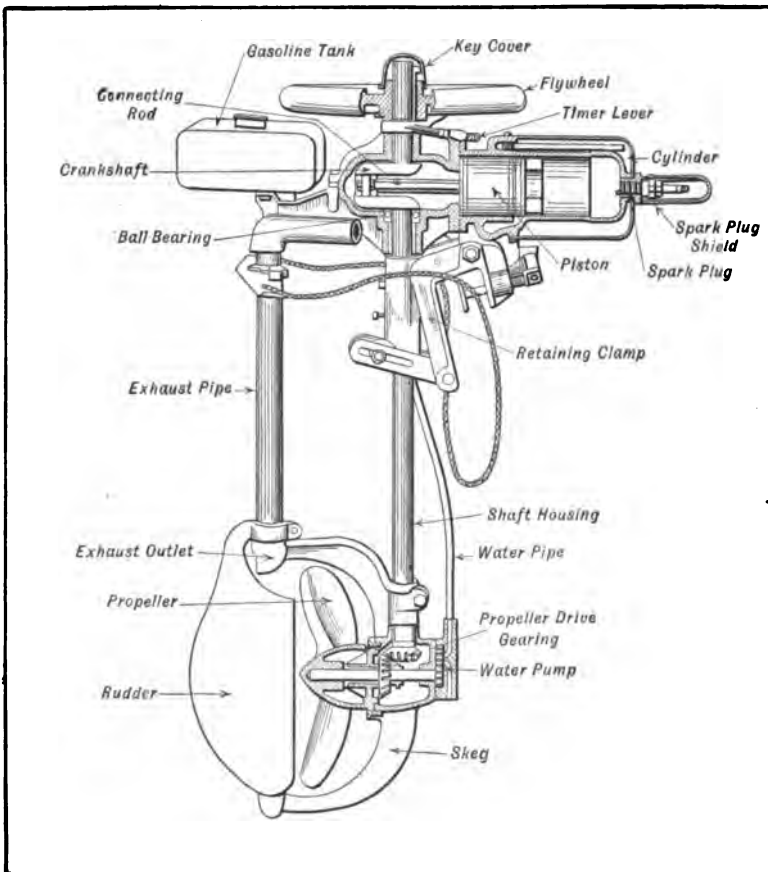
Sectional view detailing internal construction of the Waterman outboard motor.
